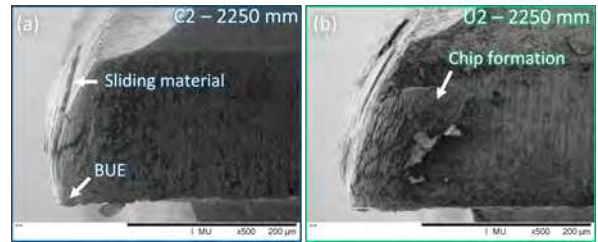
Close-up view of the tool tips for both coated and uncoated tools at a machined length of 2250 mm.
